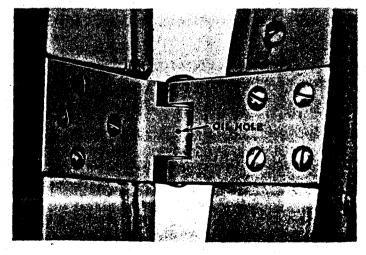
Illustration No. 67 View Showing Oil Hole in Hinge Assembly.
